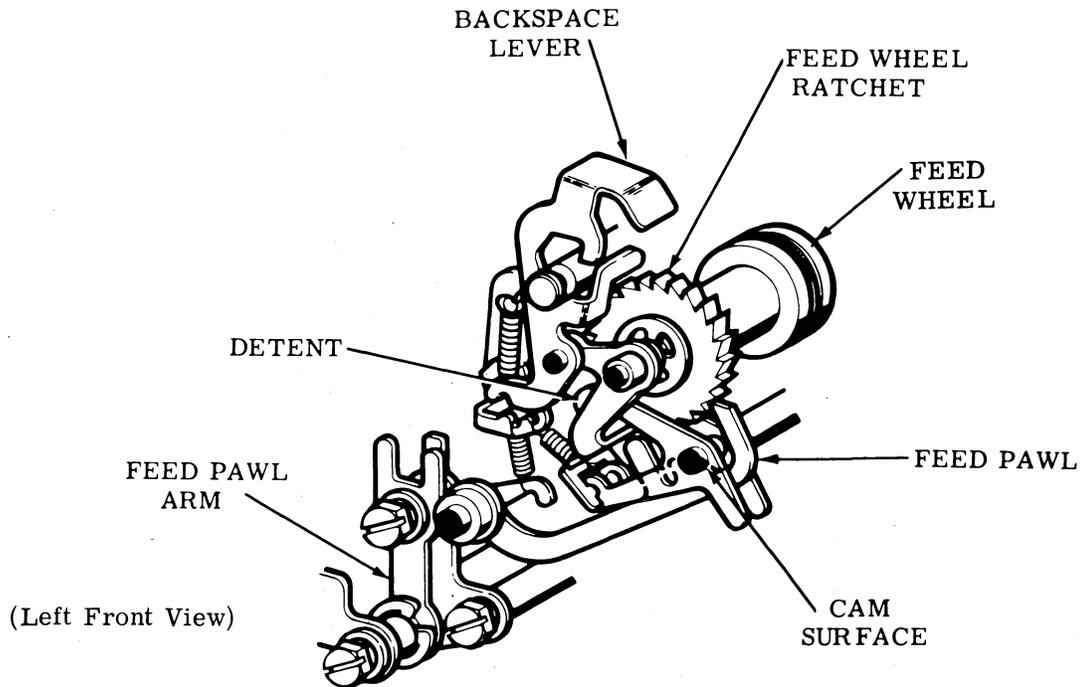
Feed Wheel Mechanism (Tape Feed Mechanism)
